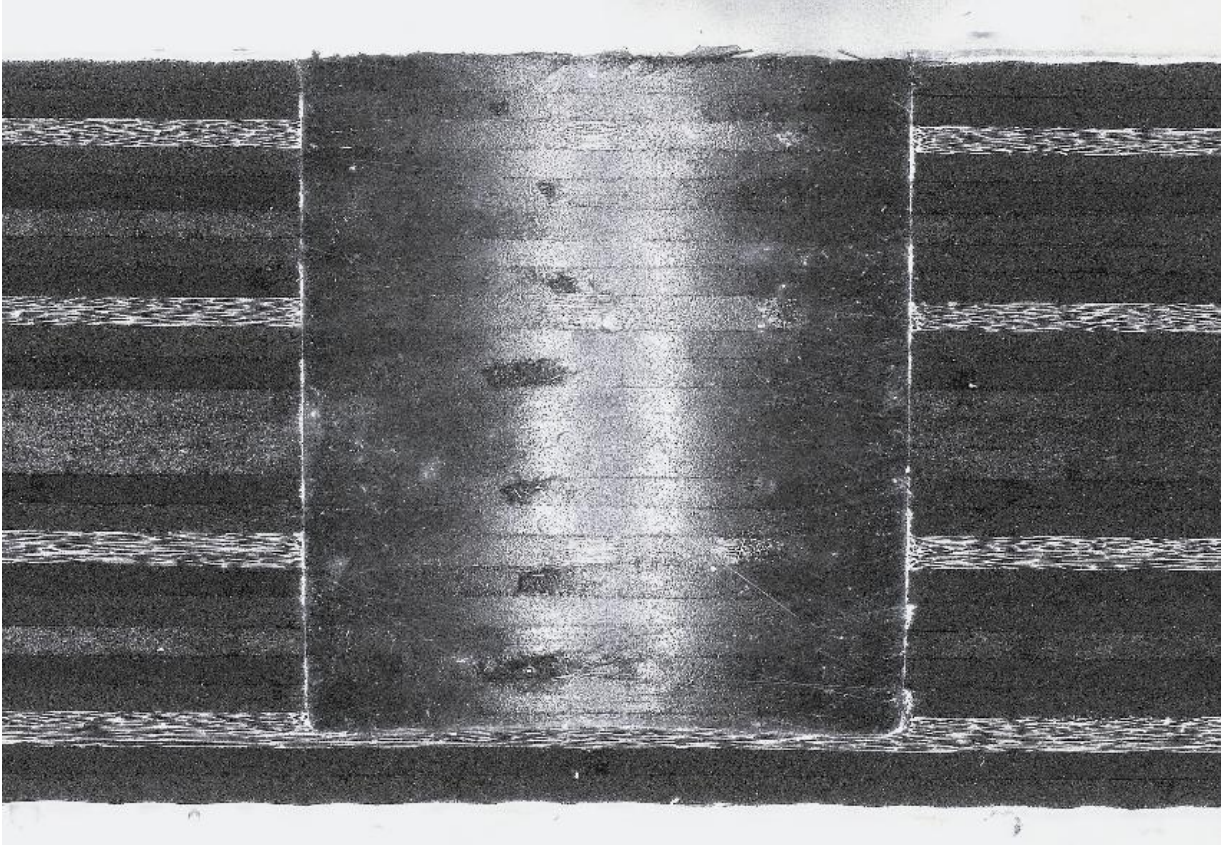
Hole V-02: Drilled hole with vacuum jig of specimen CSAI - RPR - S - 20J - 1.
